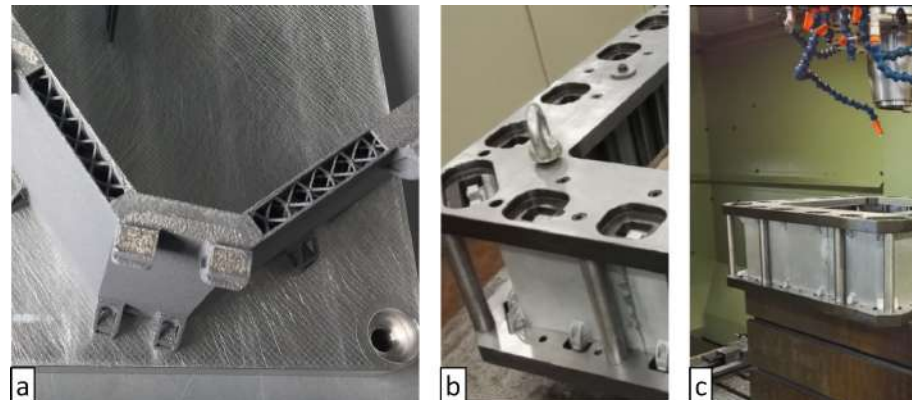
Fabricated component (a), assembly within the jig (b), machining (c).
